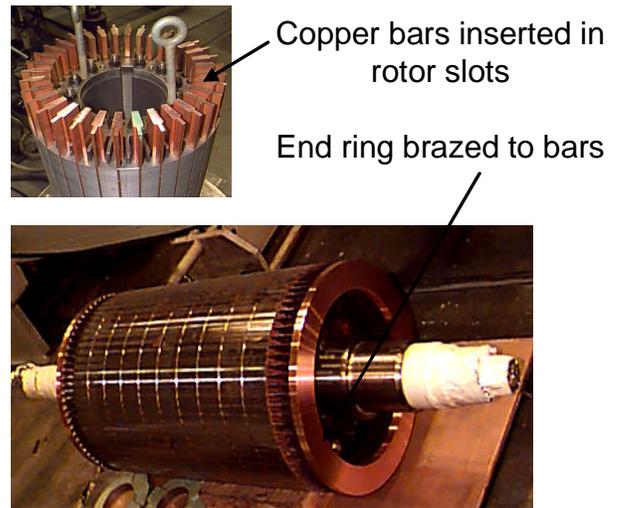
Fabricated copper bar rotor using traditional copper rotor manufacturing techniques.
